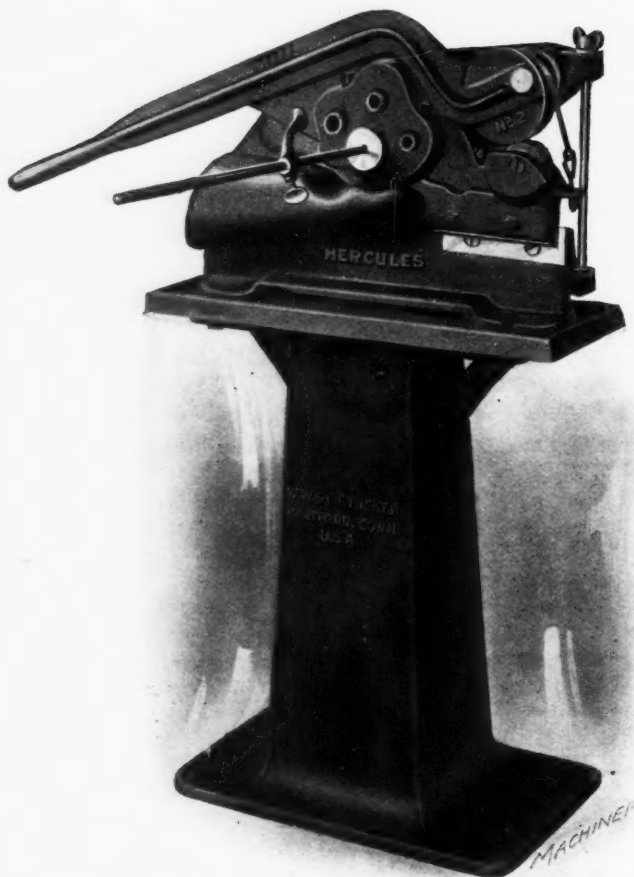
W. M. & C. F. Tucker No. 2 Shear and Rod Cutter
